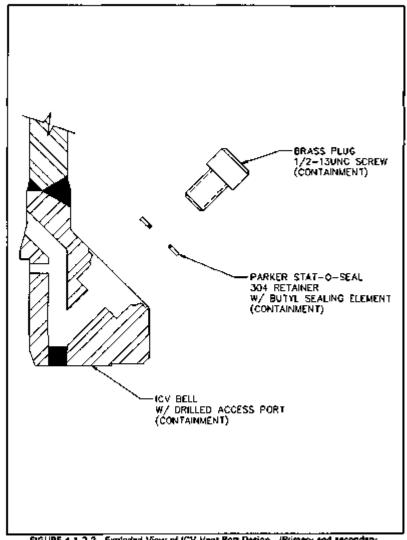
Exploded View of ICV Vent Port Design. IPrimary and secondary vent ports are identical except for rencontainment primary vent port inner tube.]
